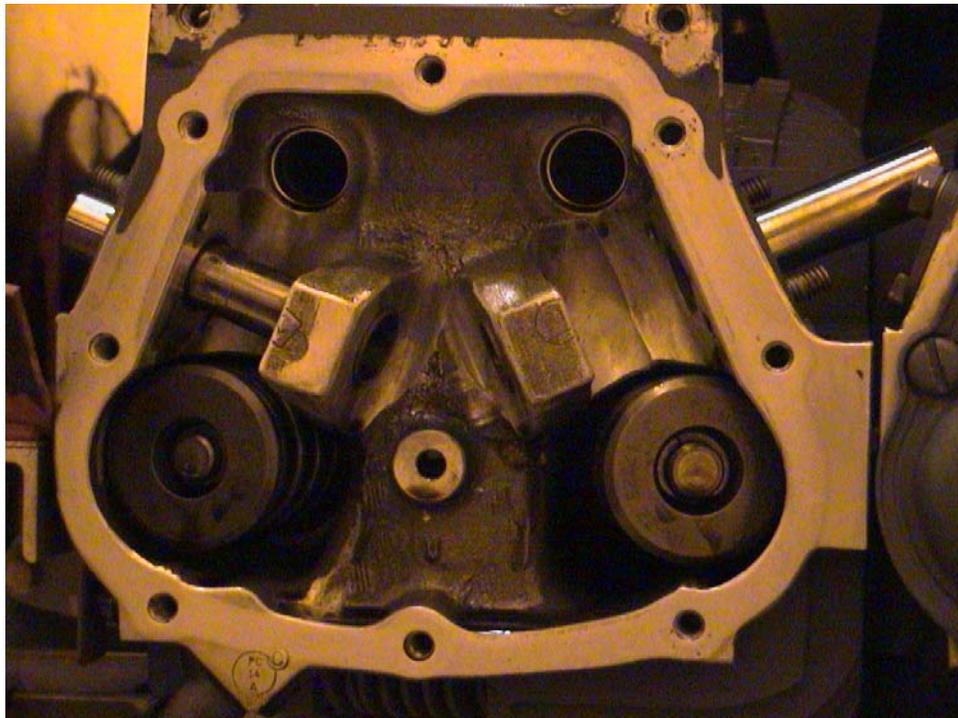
LYCOMING IO360-C CYLINDER WITH ROCKER ARMS REMOVED
